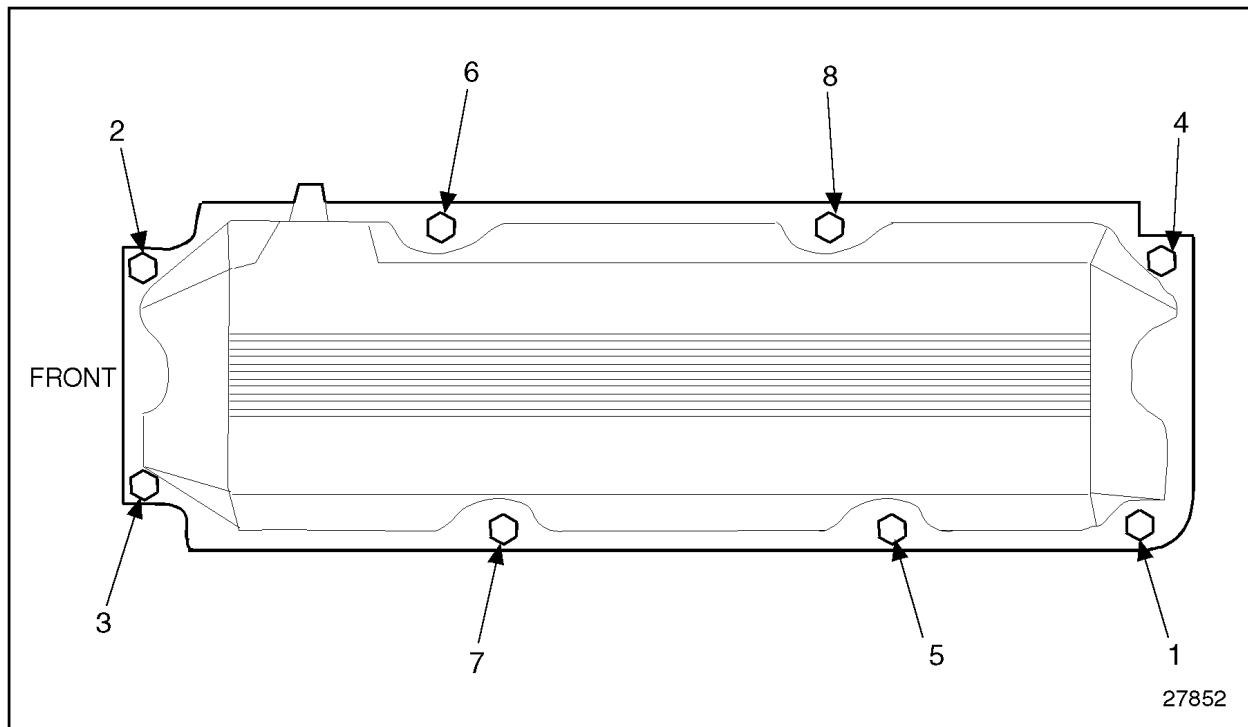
Rocker Cover Bolt Tightening Sequence
